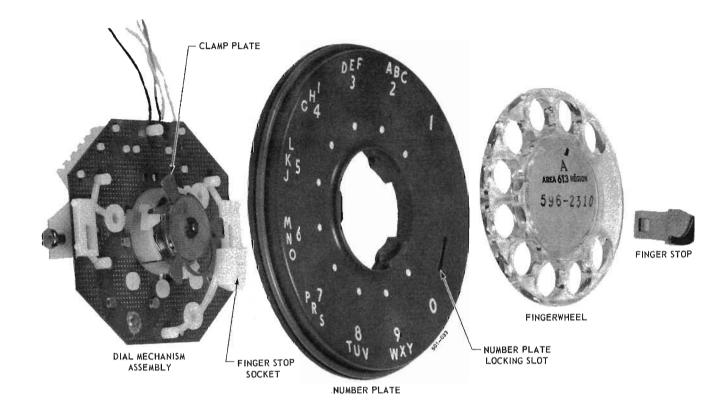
Assembly of Parts - Typical QDB1-Type Dial
